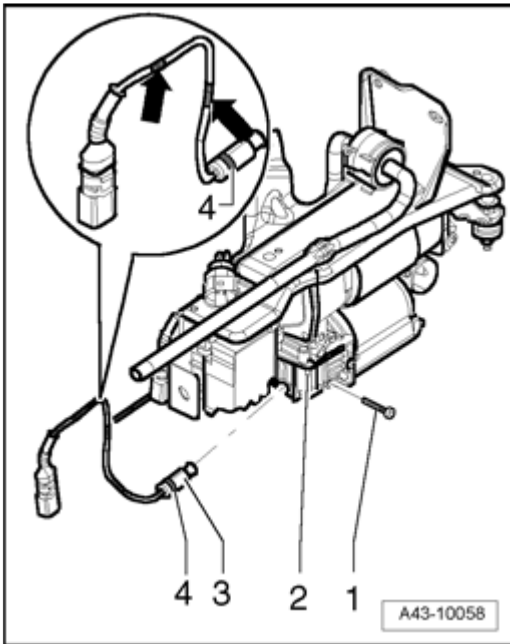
Identifying Bolt, O-Rings, Housing, And Level Control Pump Temperature Sensor
